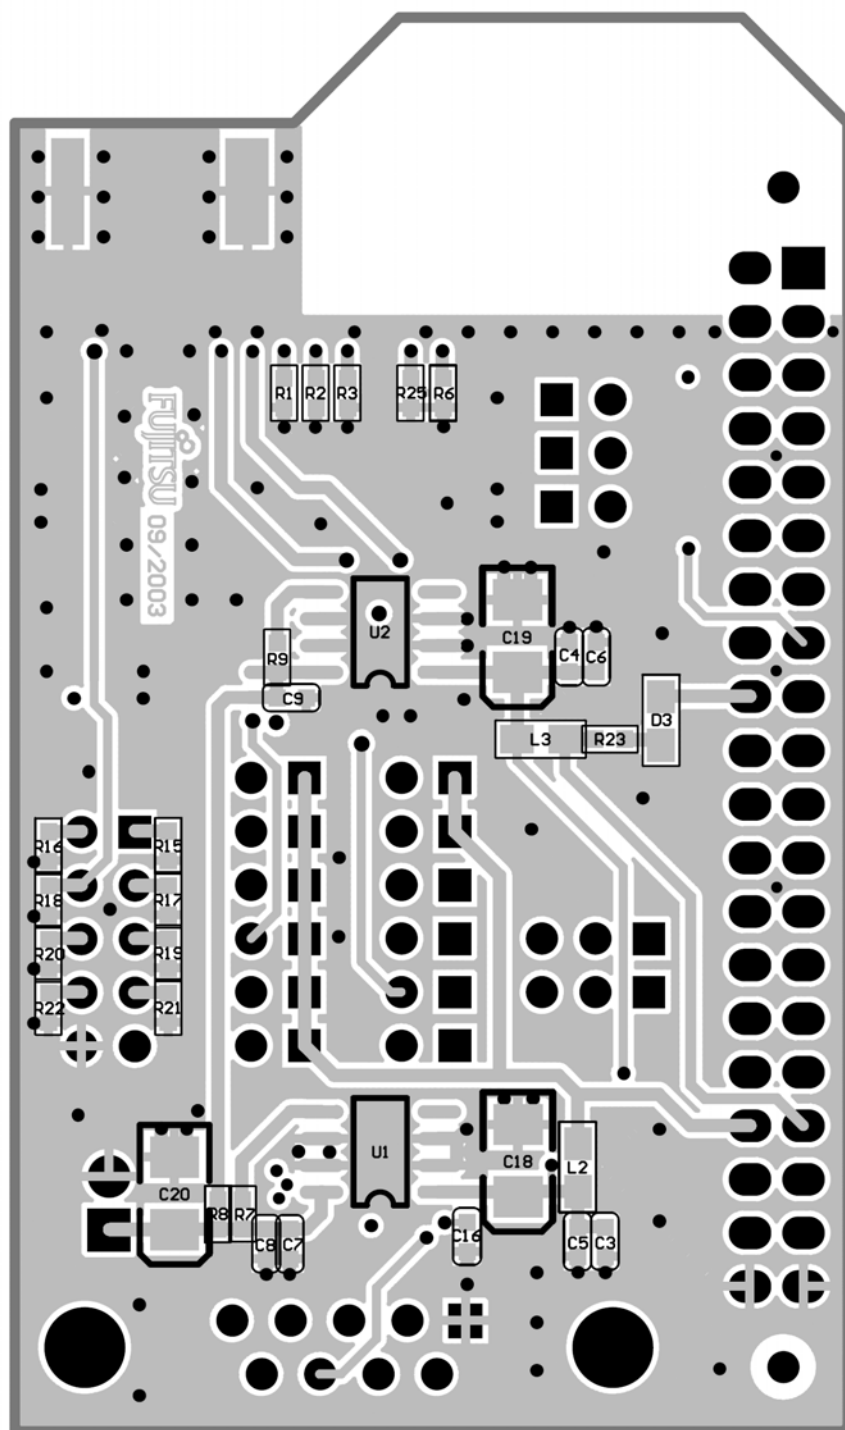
Applications Board Bottom Layer (original size: 67 mm * 40 mm)
